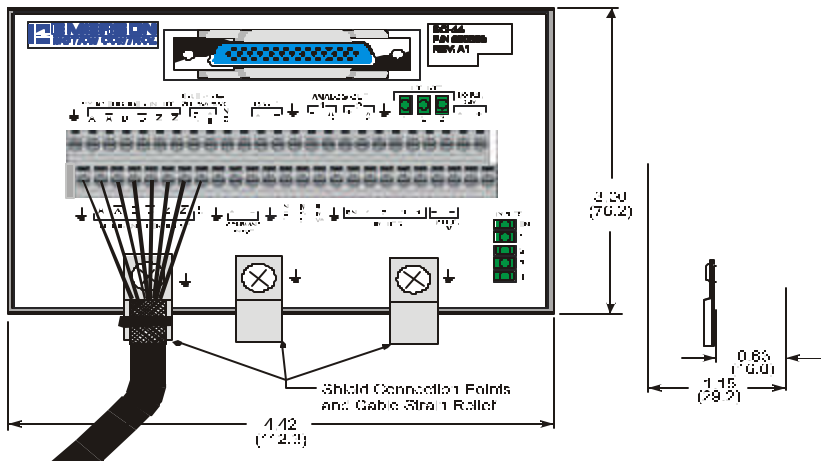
ECI-44 Mounting Dimensions, Inches (mm)
